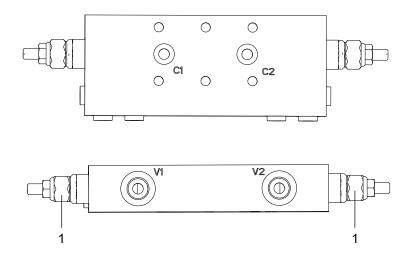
Oscillation counterbalance valve (PN.202040003032)
